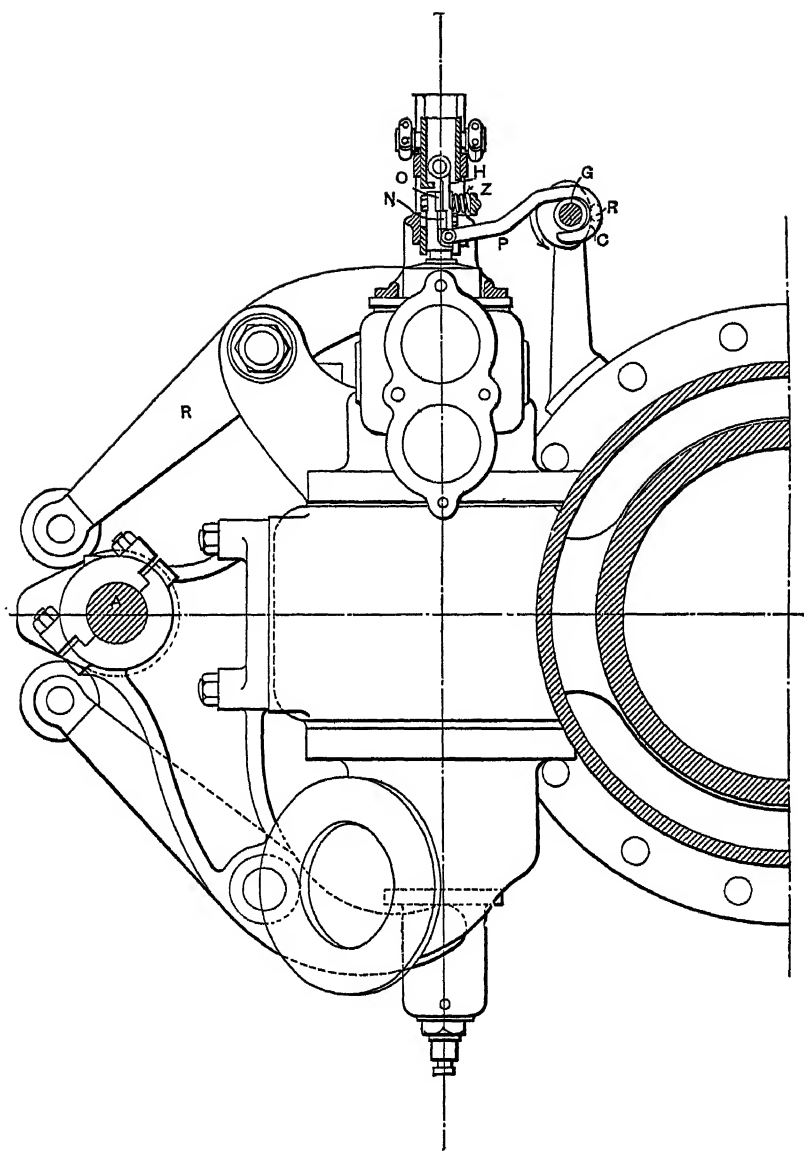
The "Snow" Standard Valve Gear. Cross-section through Cylinder.
